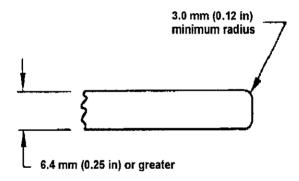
Requirements for Rounding Exposed Edges 6.4 mm (0.25 in) Thick or Thicker
